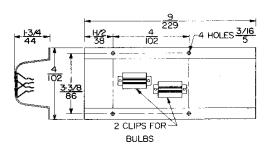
SHL10A-603R Bulb Weather Shield Dimensions <u>in.</u> mm
